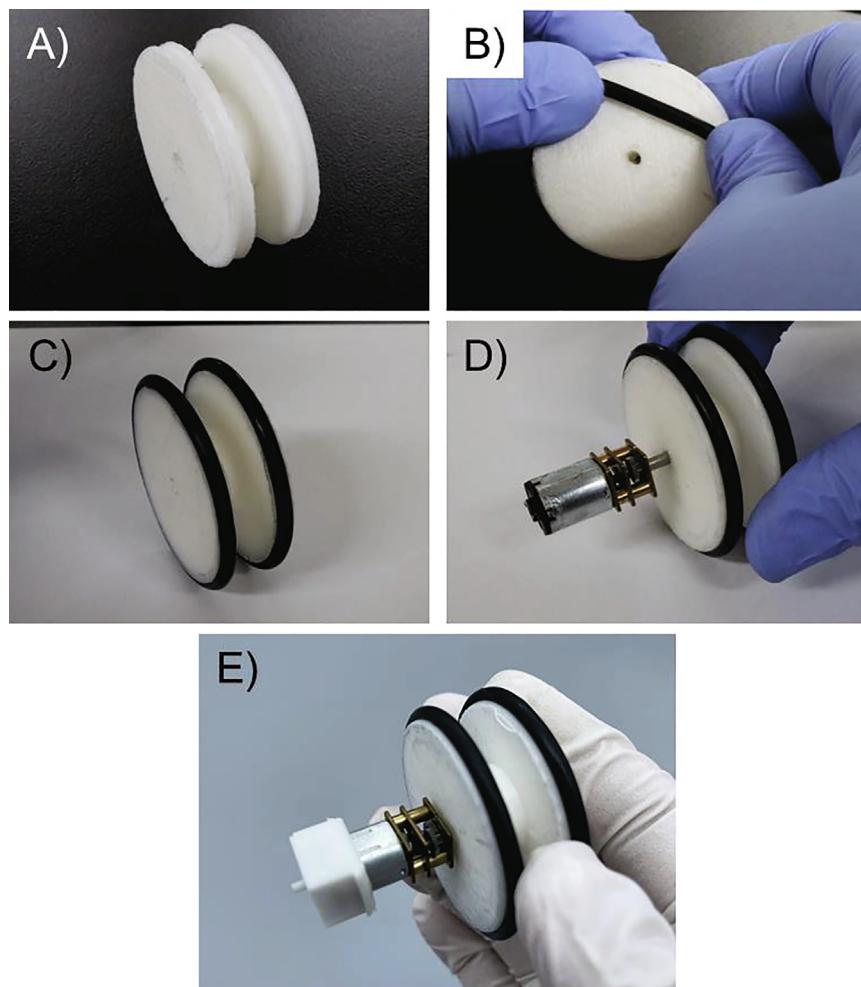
A) 3D printed wheel with grooves. B) Photo of o-ring being places in the groove. C) Wheel with two o-rings assembled. D) Motor's shaft is fitted into the wheel's axis. E) Motor is fitted into the motor holder.
